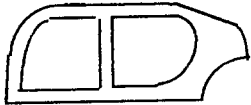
Formability of welded plate (dissimilar material with different thickness)
